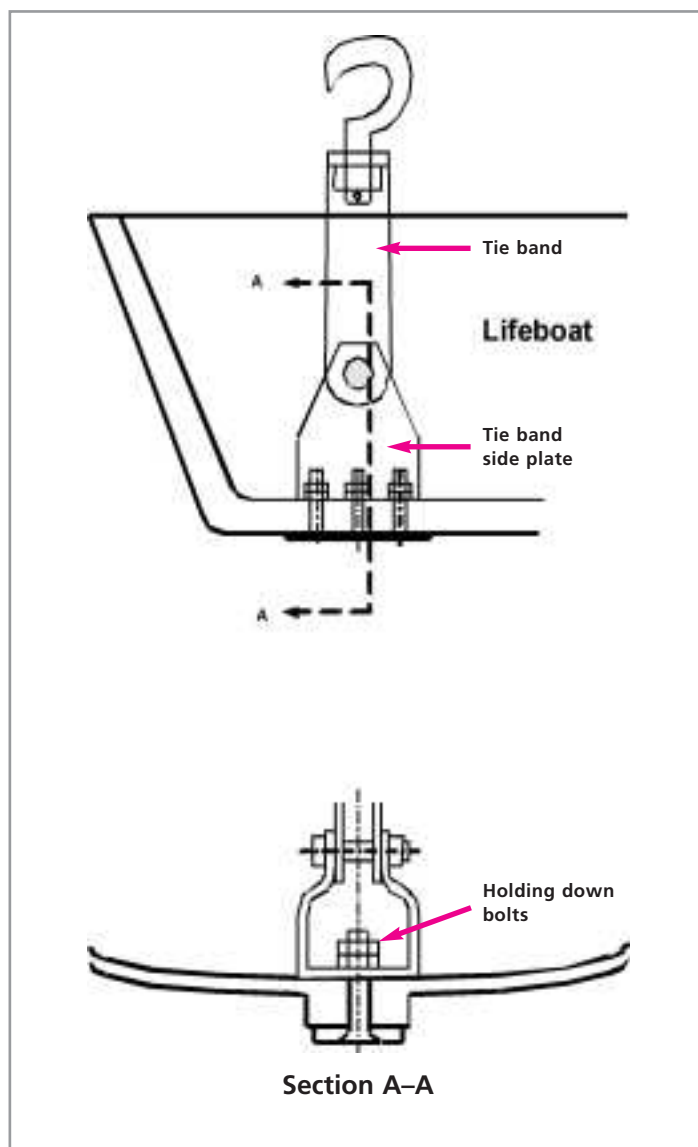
Tie band side plates connected to the boat with three bolts and with one counter-nut per bolt.
